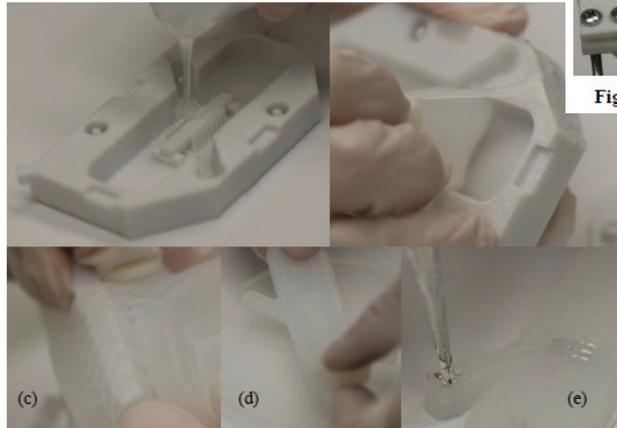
Fabrication process: (a) pour silicone elastomer into mold, (b) cure completely and remove, (c) pull out bar defining ferrofluid core (d) seal top and bottom to partially cured silicone and (e) fill with liquid metal and ferrofluid
